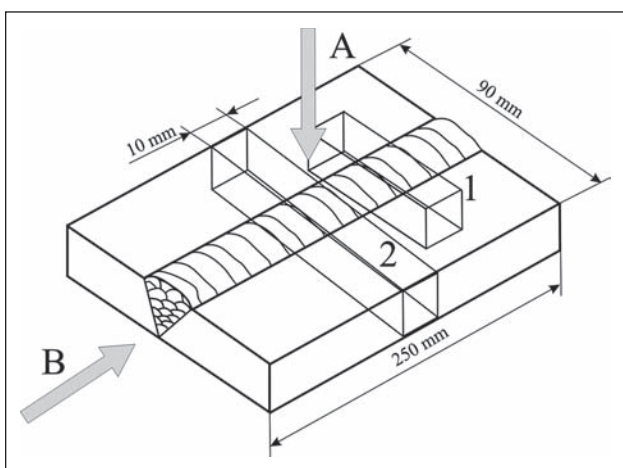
A butt welded joint; (1) specimen for micro and macro analysis, (2) tensile test specimen, (A) top view and (B) side view in the transverse direction to welding direction
